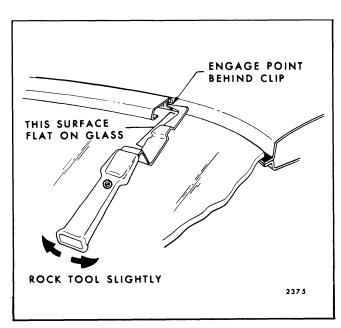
Reveal Molding Removal Tool Usage Procedure (Illustrated Tool Is For "X" Styles Only, Refer to Fig. 11-4
